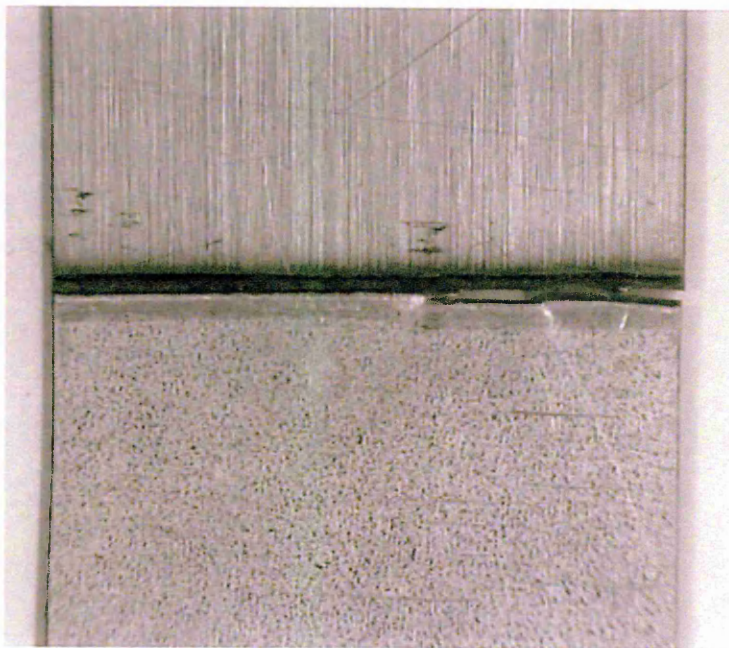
1.2mm V1437 – 1mm 2101 dissimilar metal butt joint fatigue failure – V1437 HAZ failure
